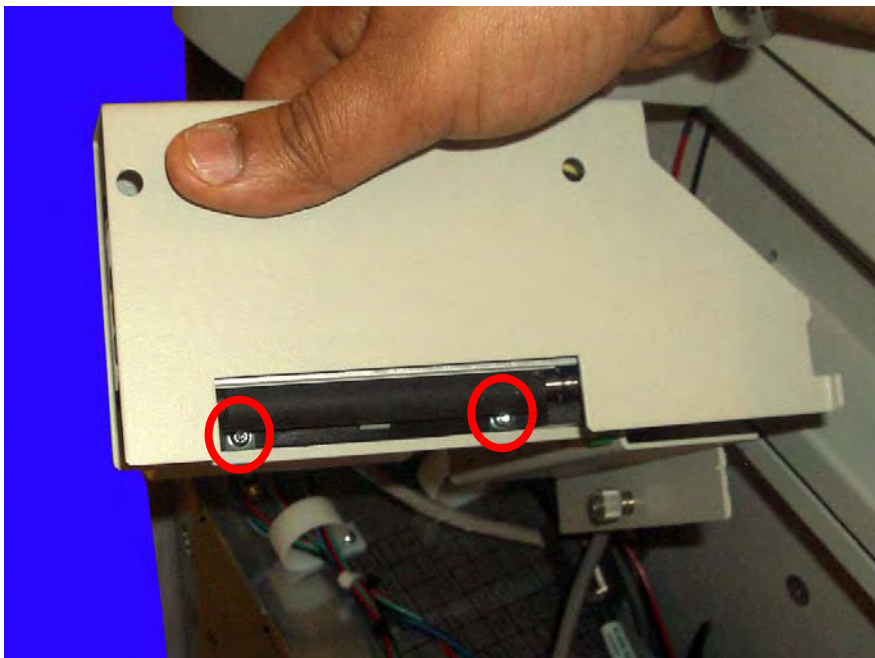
Remove the two screws that secure the printer to the bracket.
